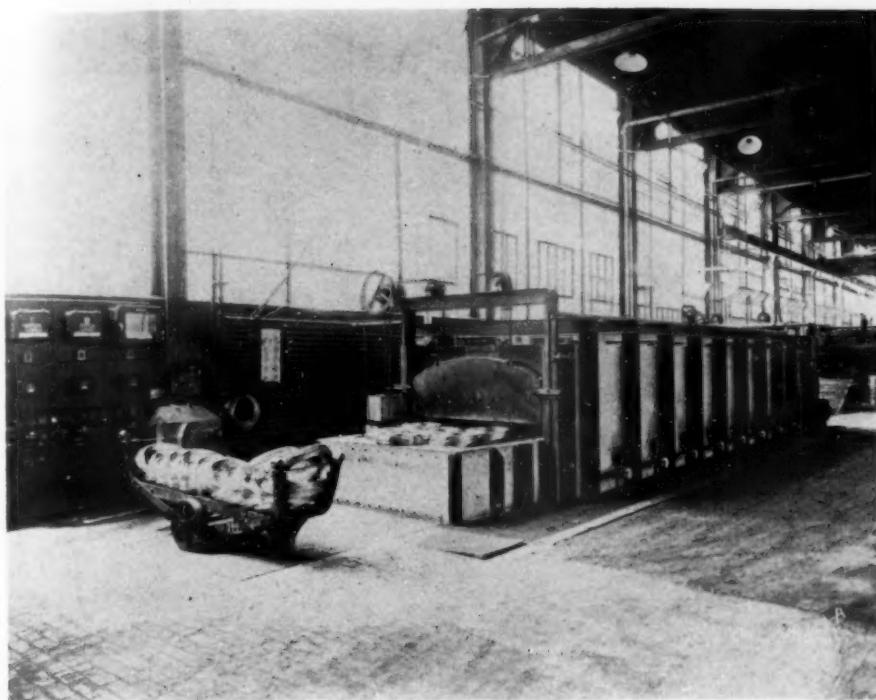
Continuous gas fired furnace clean annealing brass and bronze wire in coils. The coils are carried through the furnace continuously on a series of heat-resisting alloy chain conveyors spaced to carry both large and small coils. This furnace anneals 5,000 lbs. of wire per hour.
